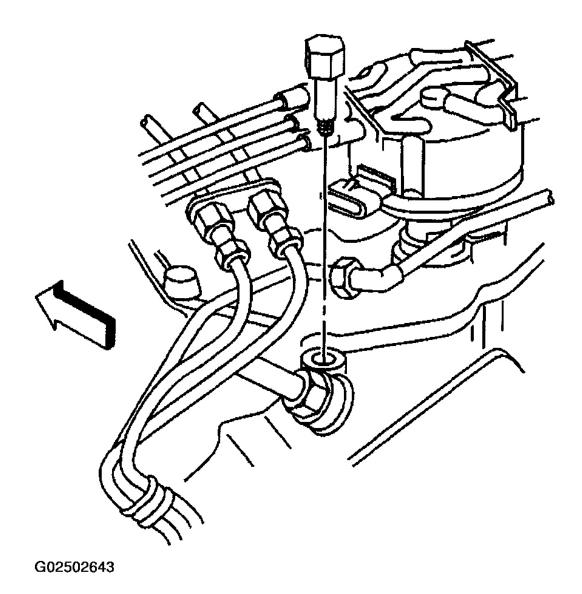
Installing Engine Oil Pressure Gage Sensor Fitting Courtesy of GENERAL MOTORS CORP.
